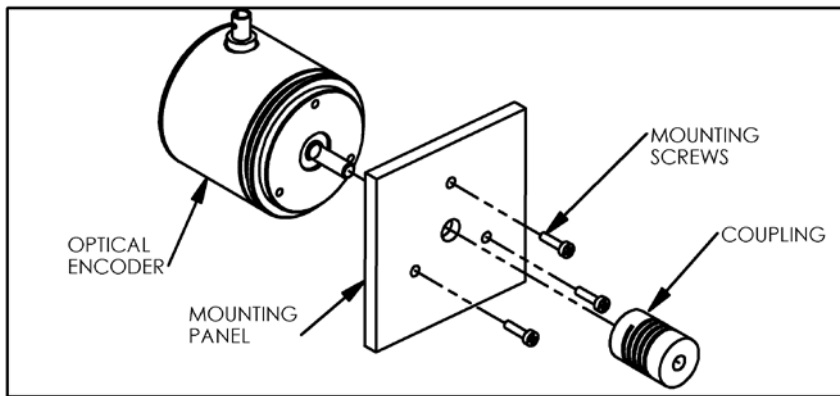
Shafted Encoder Face Mount via Counter-Bored Panel
